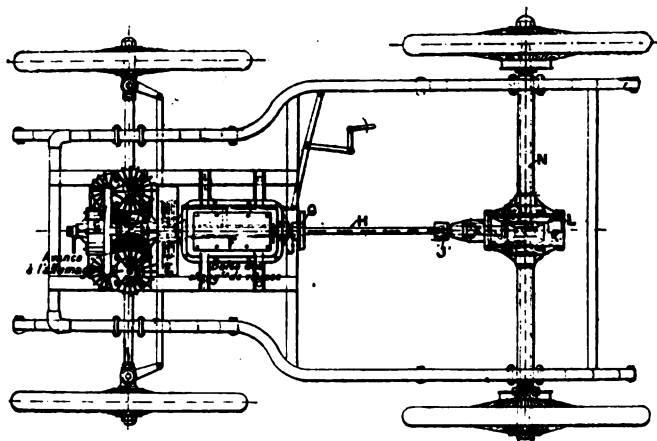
PLAN OF SIRENE VOITURETTE.
